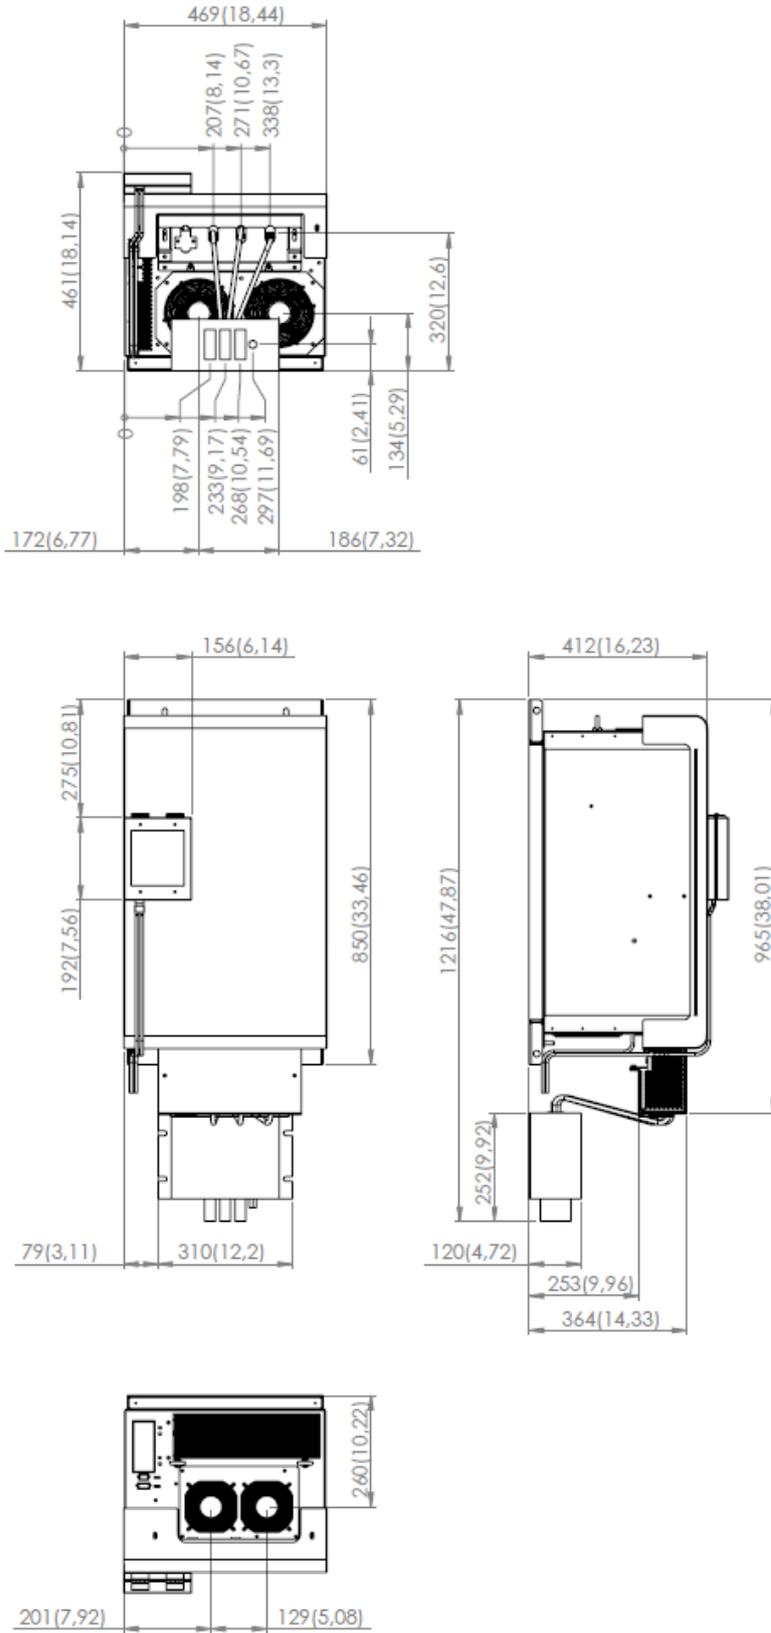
Dimensional drawings ECOsine® active FN3420-100/120-480-3-GL
